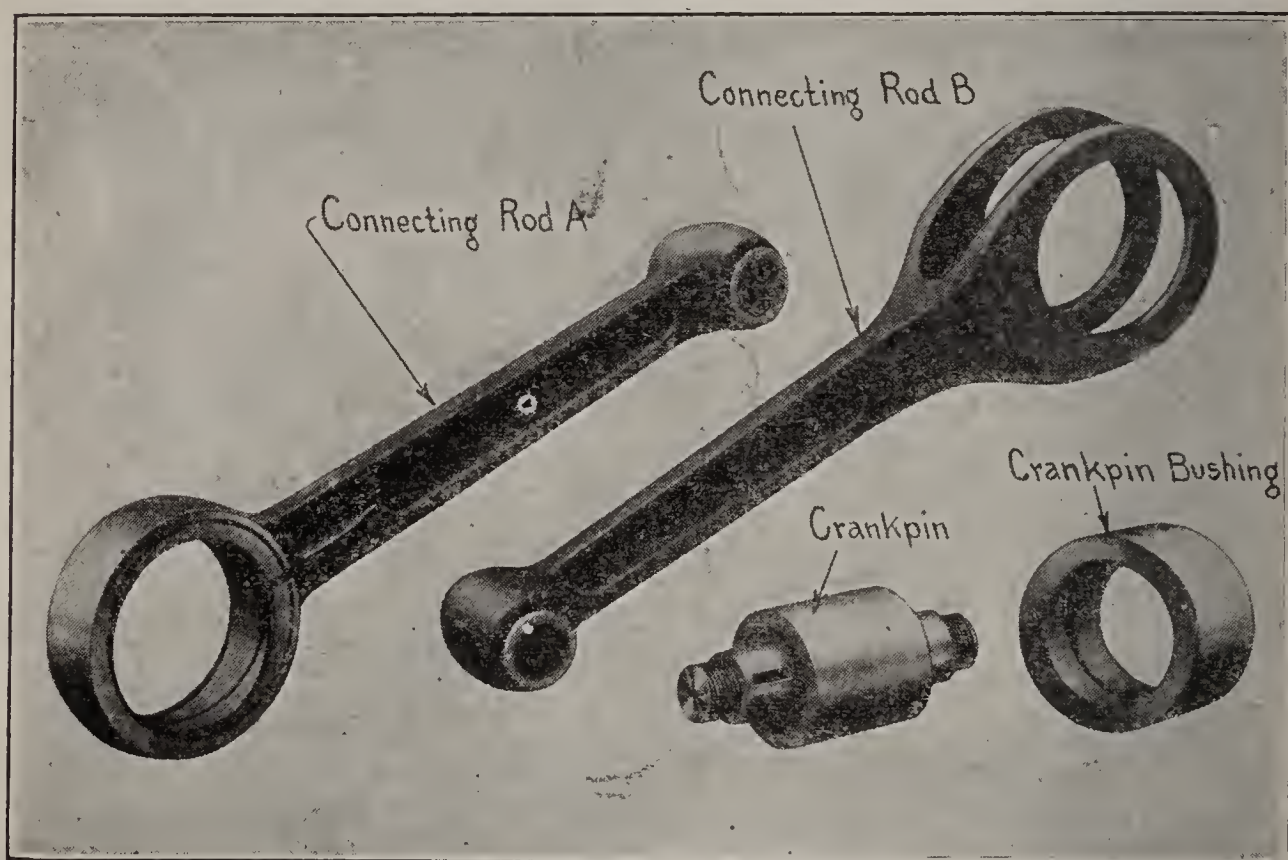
Components of Twin Cylinder Connecting Rod Assembly Taken Down to Show Design of Connecting Rod Big End.
